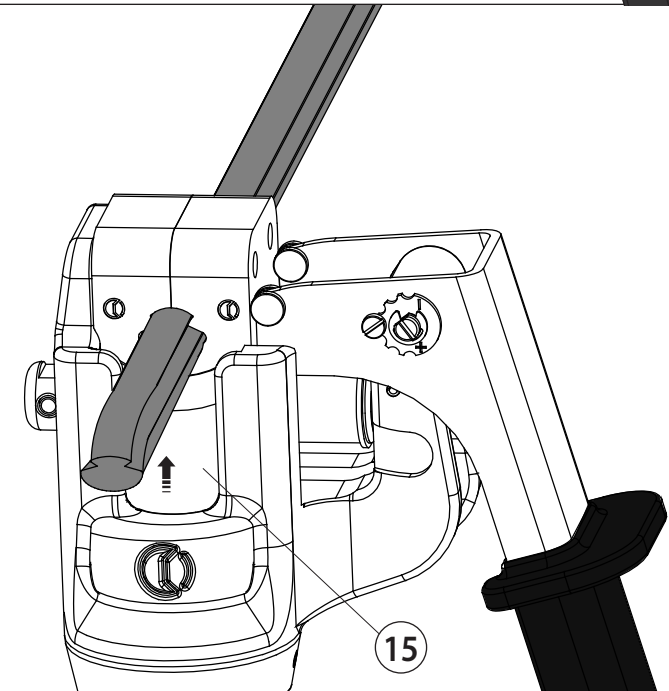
CUTTING - COUPE - SCHNEIDEN - CORTE - TAGLIO
